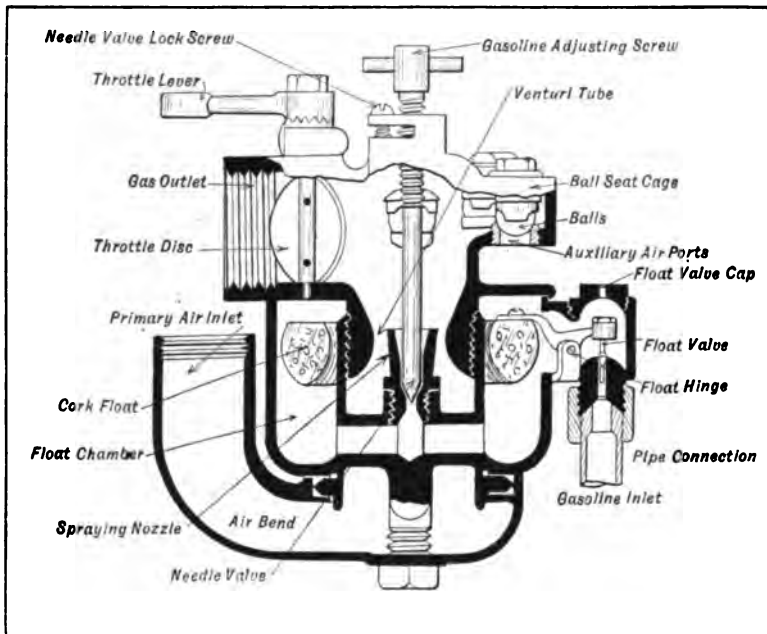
Kingston automatic carburetor admits auxiliary air through ball-controlled ports at side of mixing chamber.
